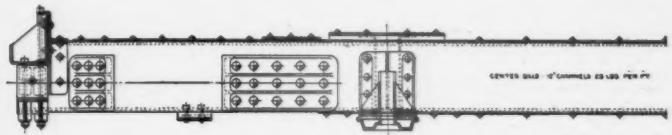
A Satisfactory Design of Center Sill and Draft Gear Connection.
